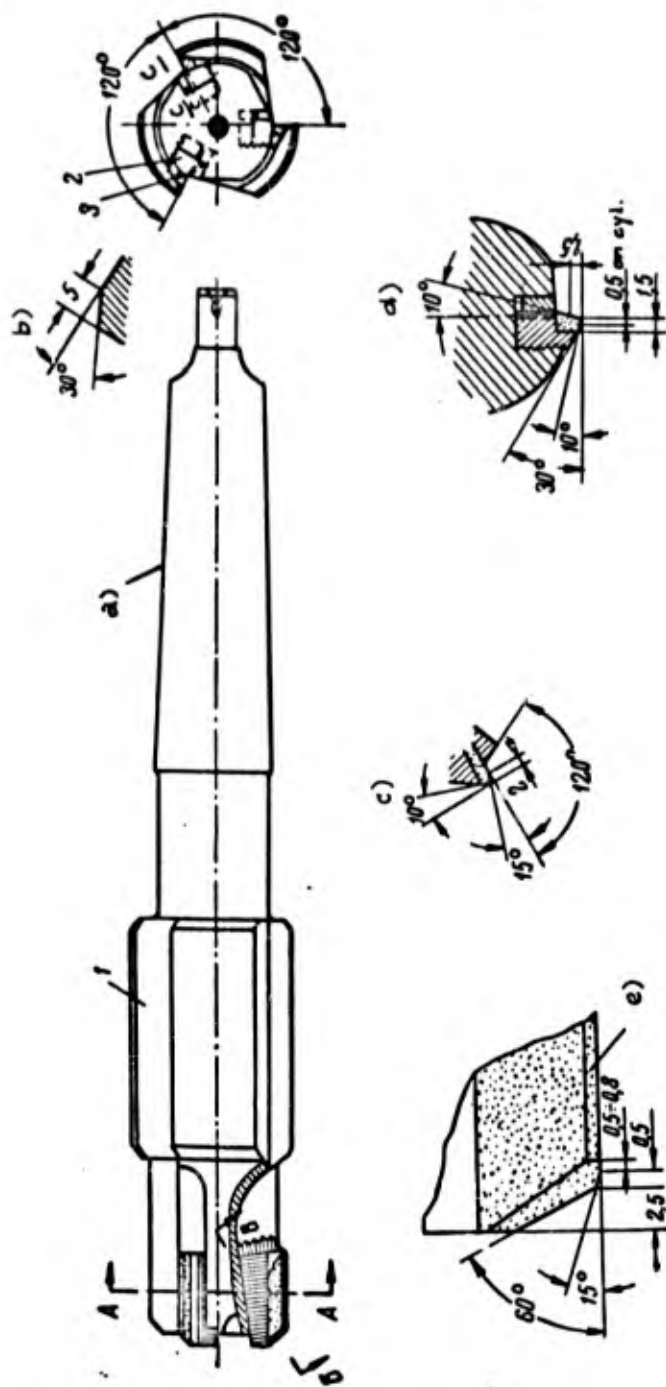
Assembled Type of Rose Reamer, Made by the NIAT, with Rear Guide Bushing and Taper Shank
